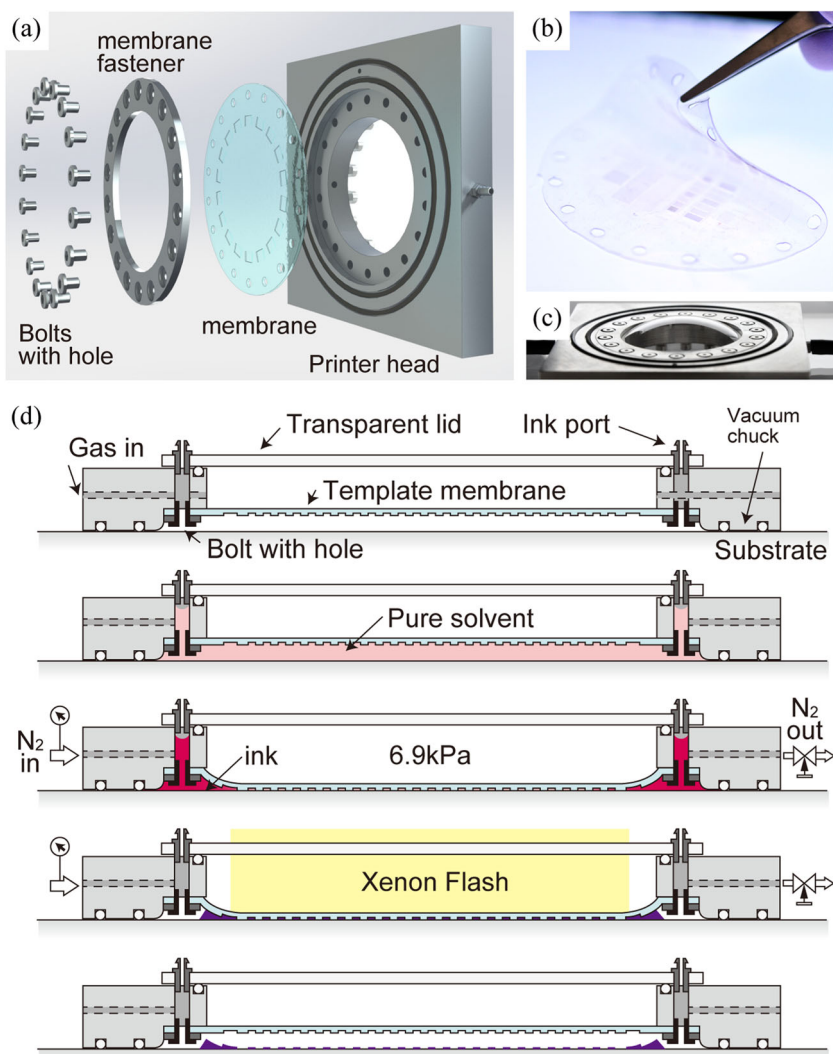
Design of the printer head and printing procedure. a Assembly drawing of a printer head; b fabricated template membrane; c inflated membrane; d procedure of the printing
